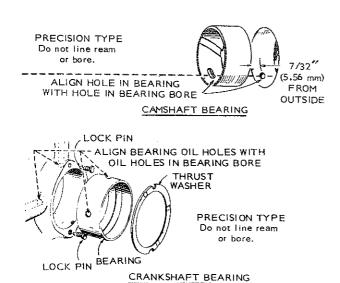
CAMSHAFT AND CRANKSHAFT BEARINGS
